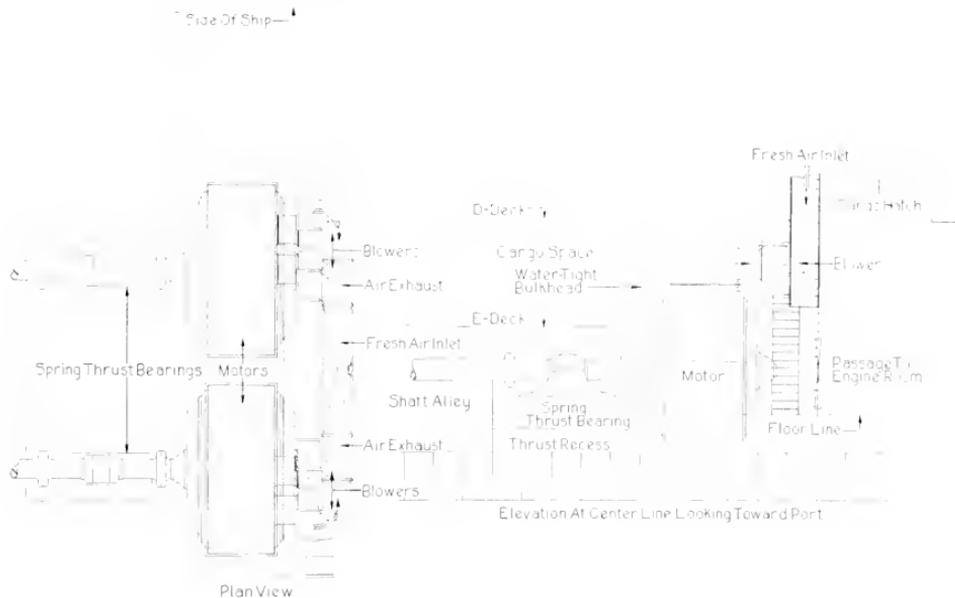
Diagram Showing Arrangement of Motor Room Aft for 30,000 Shaft H.P. Twin Screw Vessel
